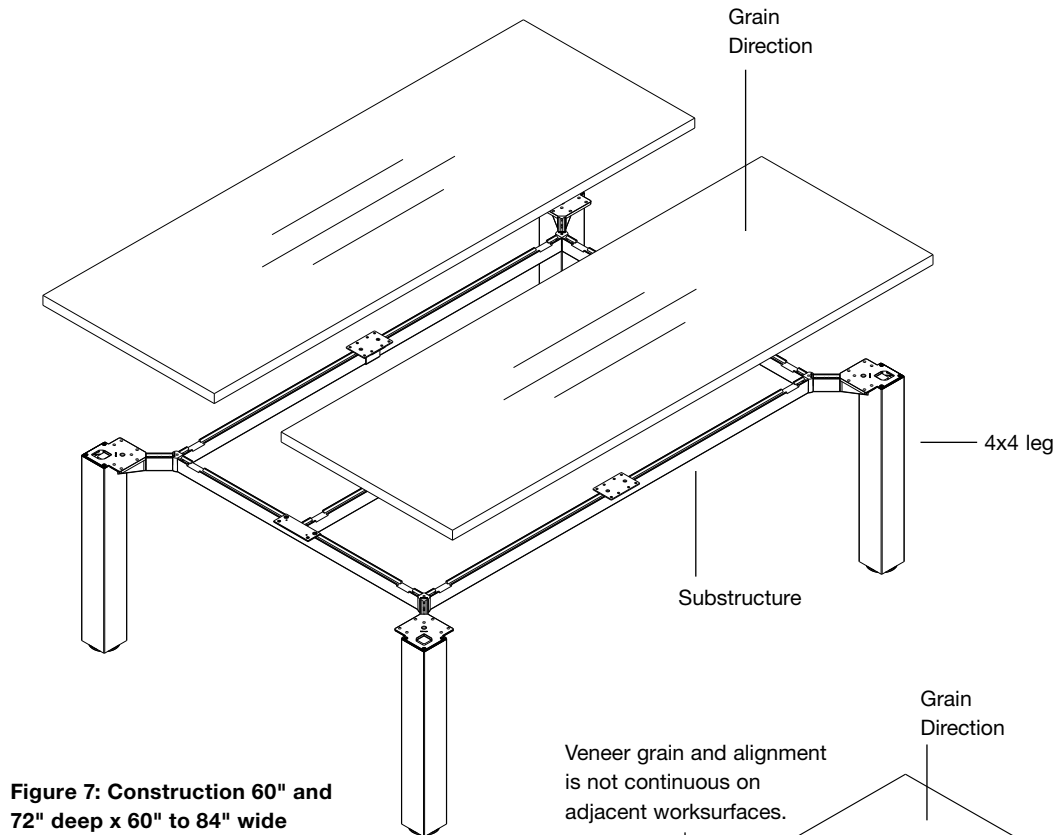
Construction 60" and 72" deep x 60" to 84" wide
